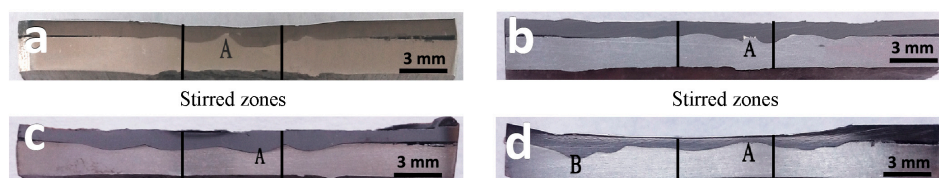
Weld cross-section morphology of FSKSW: (a) AZ31/DP600; (b) AZ31/non-zinc-coated DP600; (c) Mg/DP600; (d) Mg/non-zinc-coated DP600.
